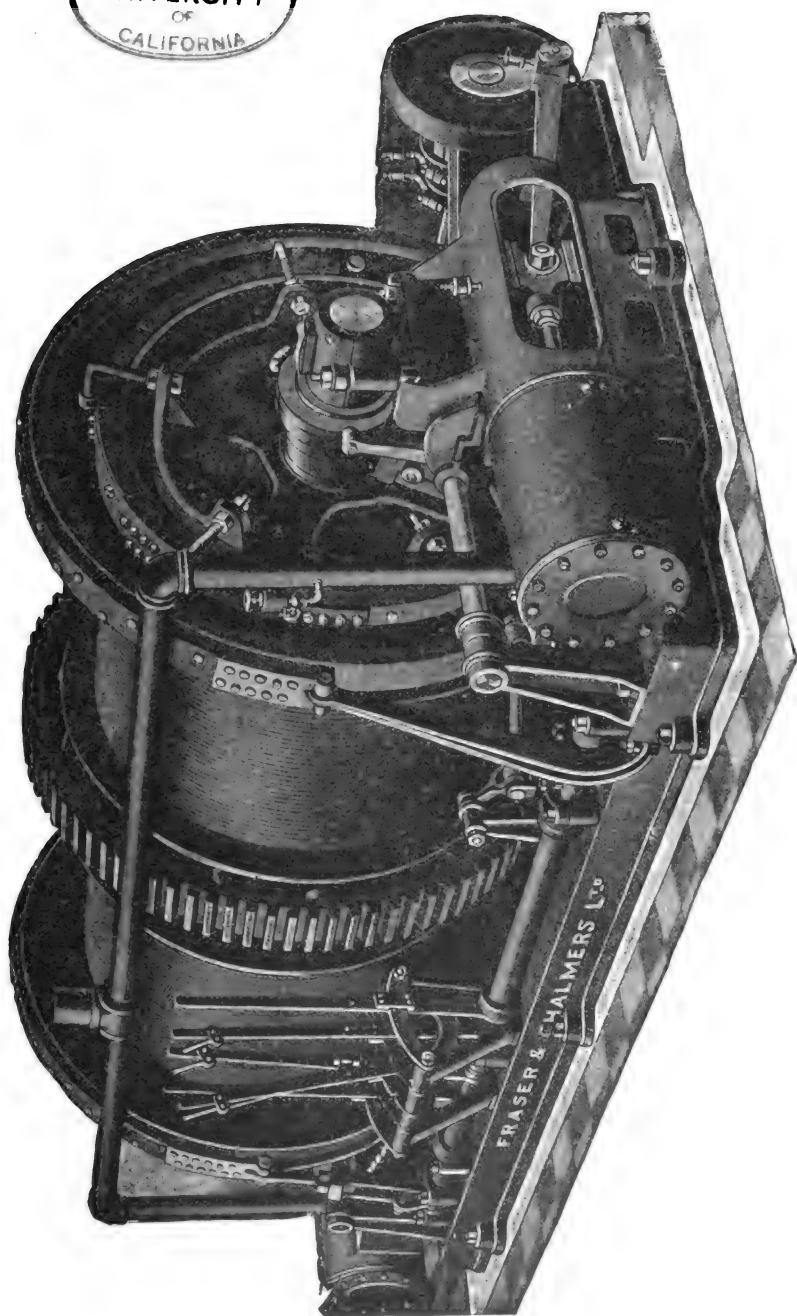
Double-cylinder Winding Engine with two Drums.
